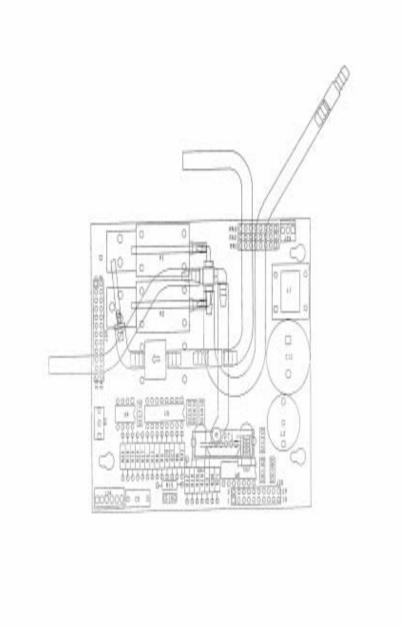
Pneumatic Board 0670-00-0605 CE
